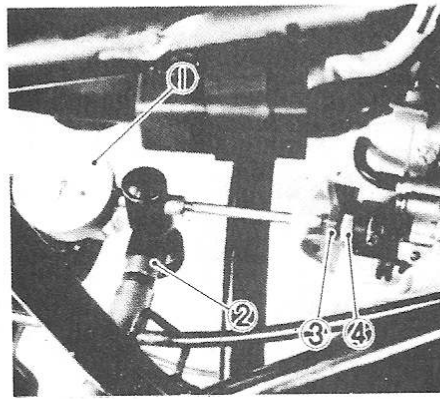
The dial indicator must be mounted as shown when checking/adjusting the pump stroke on YT 60 models (Sec 36)
